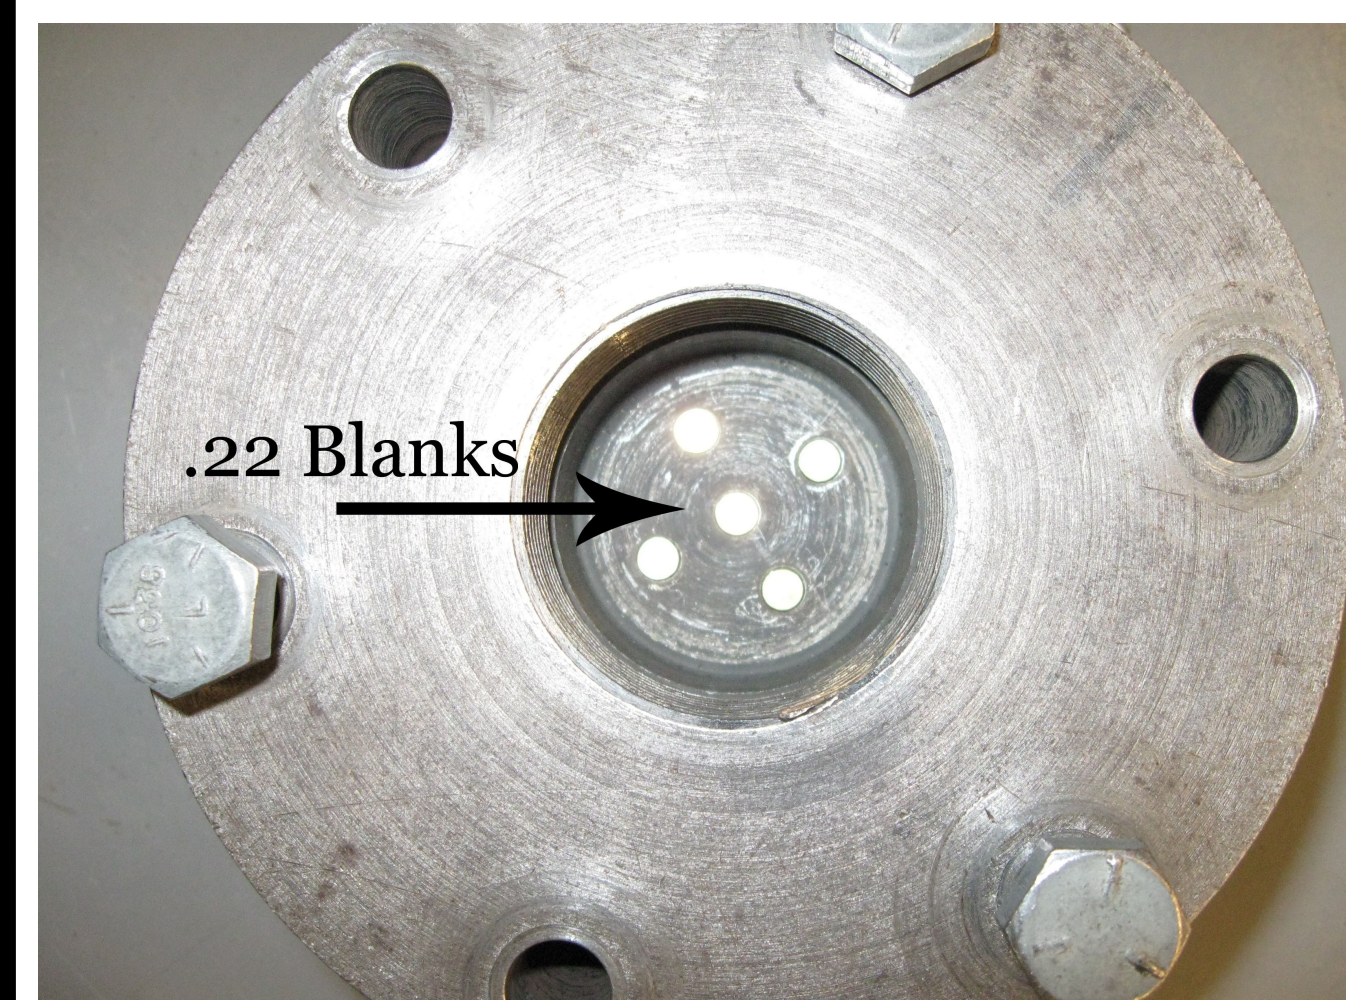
Closed Explosive Former with .22 Caliber Blanks
